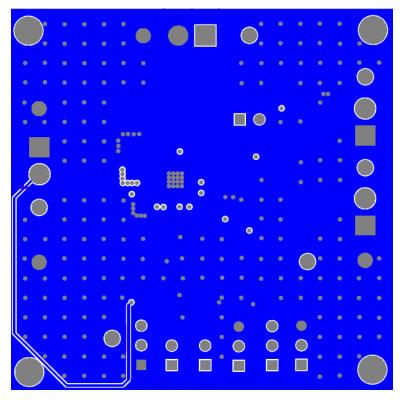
Board Layout (Bottom Layer – Ground Plane)
